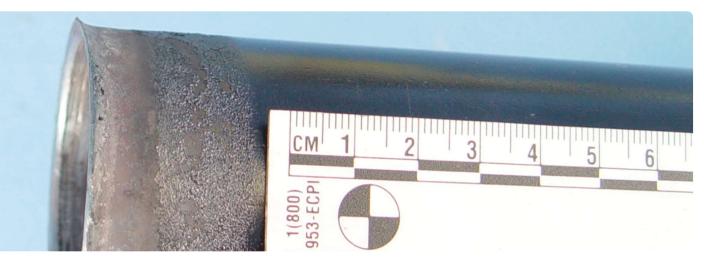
The aft fracture surface of the failed forward weld on the left side propeller shaft tube, as received.
